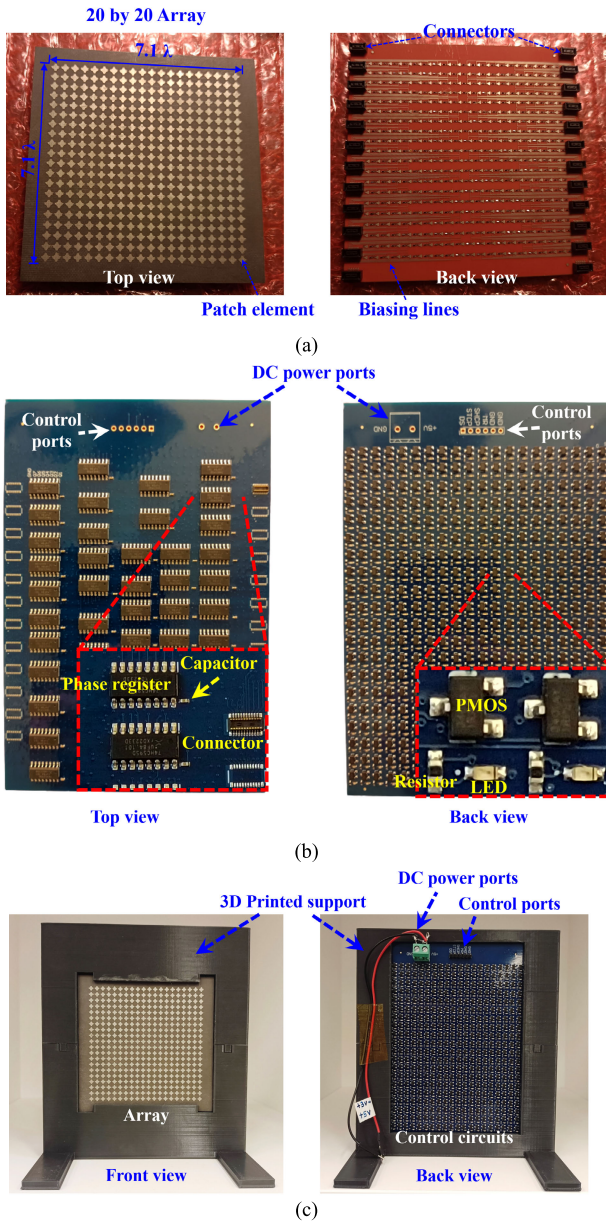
Fabricated prototype of the proposed RIS design. (a) RIS array. (b) Control circuits. (c) RIS array packaged with control circuits board through FPC connectors.
